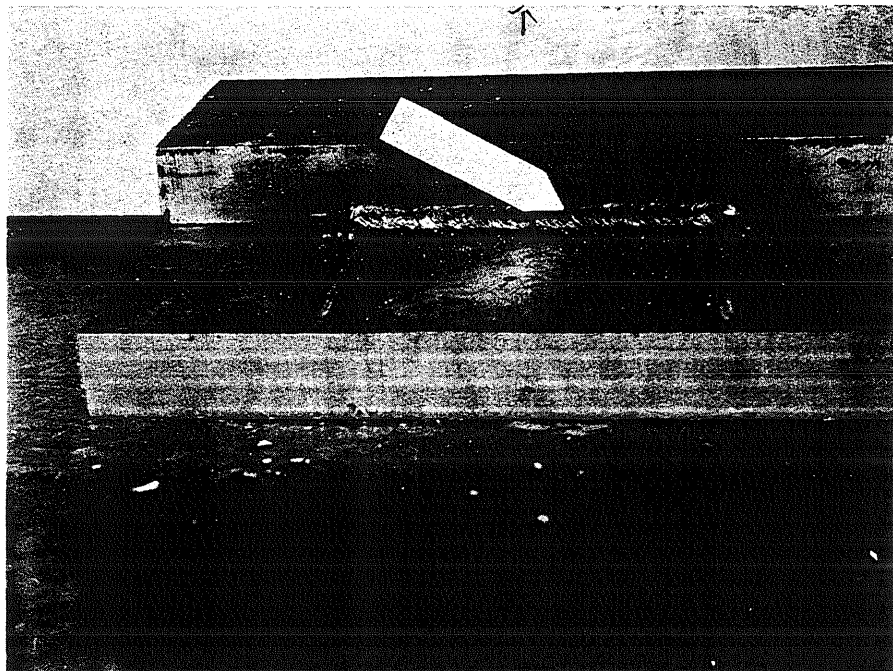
Iron Powder Showing Crack in Magnetized Specimen
